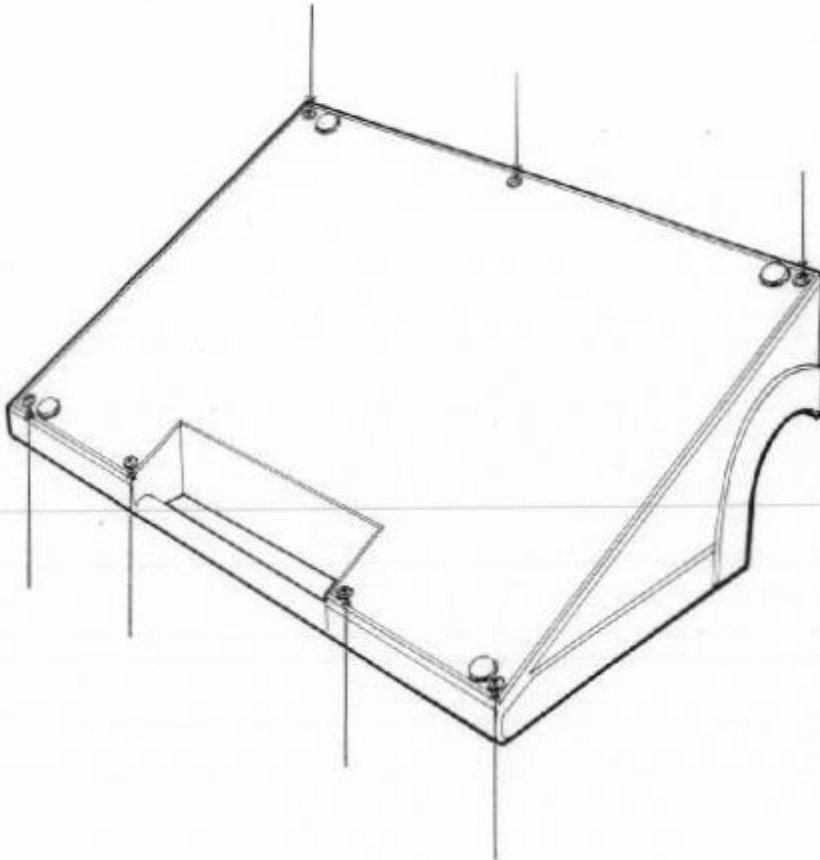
UNDERSIDE VIEW INDICATING SCREWS TO BE REMOVED FOR INTERNAL INSTRUMENT ACCESS
